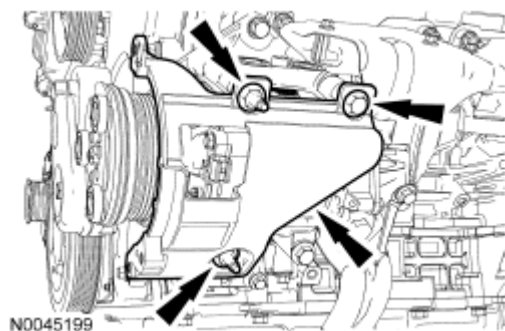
Locating A/C Compressor Shield Nuts & Bolt
